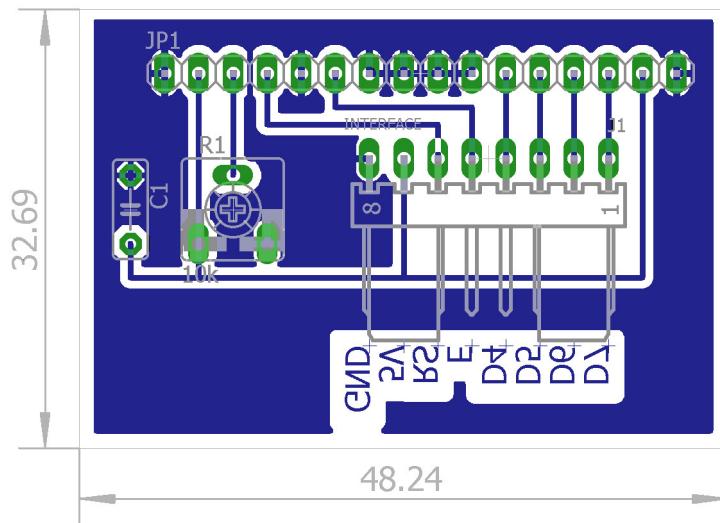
LCD breakout board PCB layout, Bottom layer with silkscreen of top layer overlaid.
